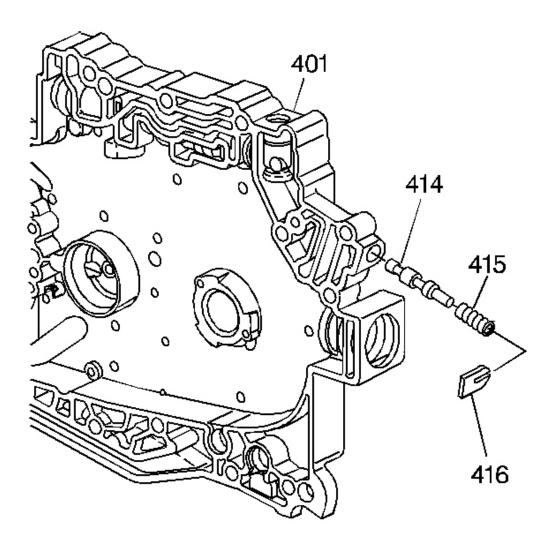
Identifying Actuator Feed Limit Valve & Case Cover
